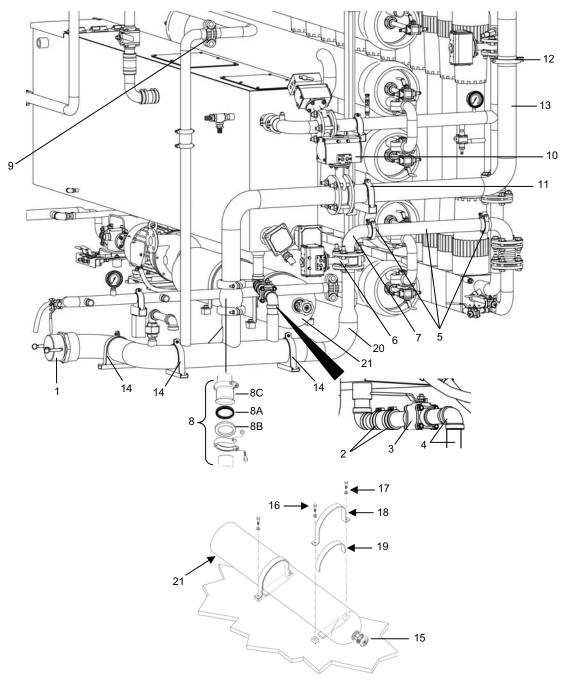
Waste Out Pipe Spool and Air Receiver Tank Removal.
